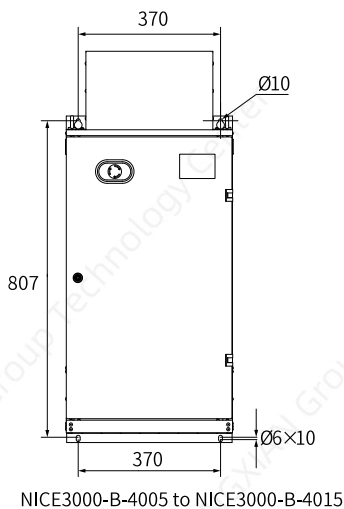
Locations and dimensions of the mounting holes of the backplate-mounted control cabinet (Unit: mm)
